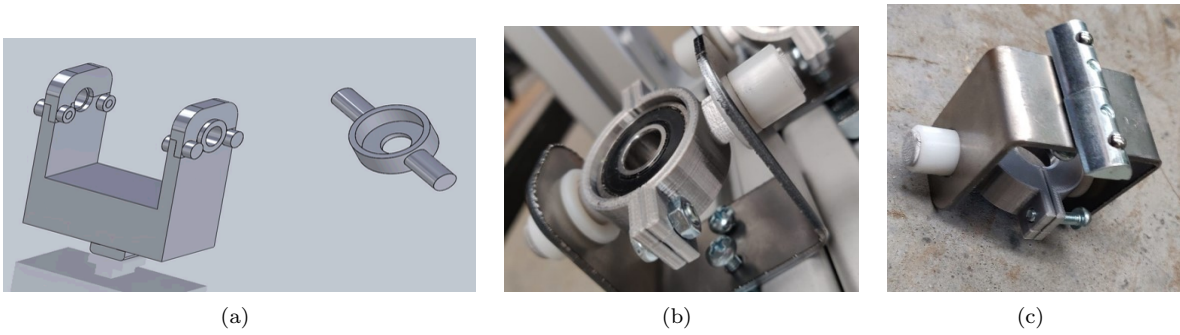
Solidworks model and updated metal versions of the receivers, included with ball bearings for guiding shaft and making rotation possible
